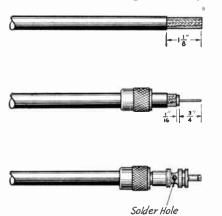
Dimensions for stripping ½-inch cable to fit Amphenol Type 83-ISP plug.
